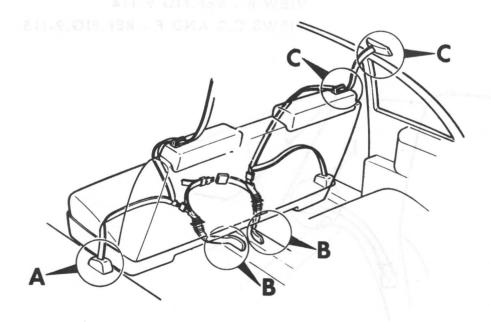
"Screw-in Type" Seat Belt Sleeve Plug Installation
